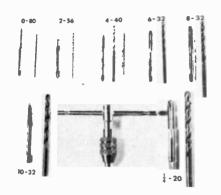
TAPS AND TAP DRILLS. First number indicates size; second, threads-per-inch.
